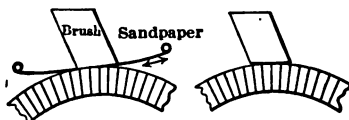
Sandpaper Held Improperly and Resultant Shape of Brush.
